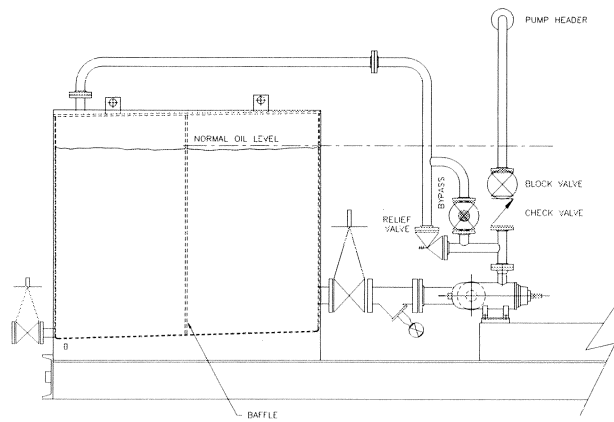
Location of Pump Discharge Check Valve and Relief Valve.
